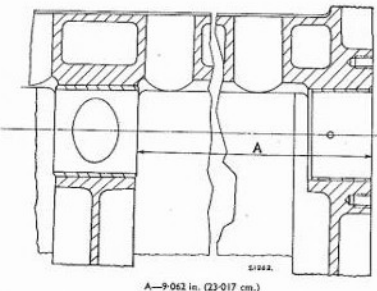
Setting dimension for the centre camshaft bearing, taken from the front crankcase face
